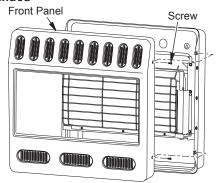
Removing Front Panel Of Heater (actual heater may vary from illustration)
